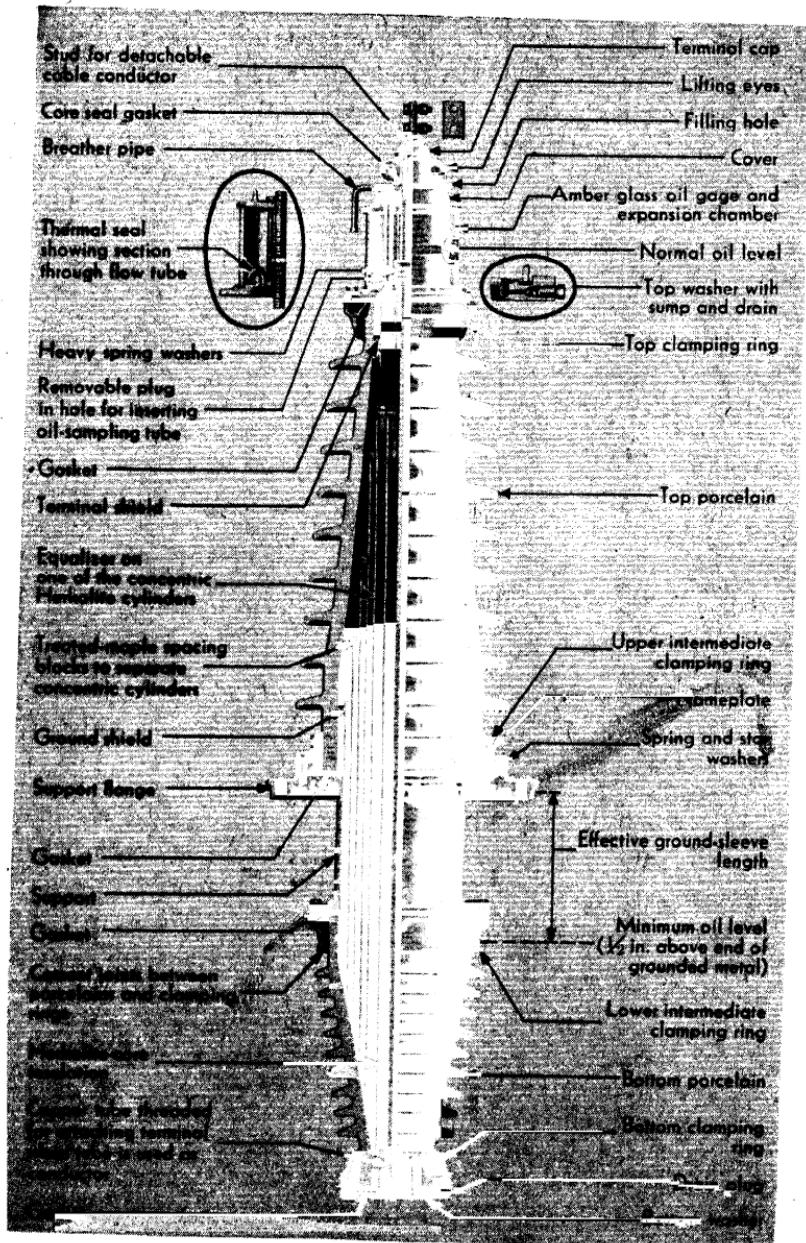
Sectional view of 115,000-volt oil-filled transformer bushing. (Courtesy of General Electric Co.)
